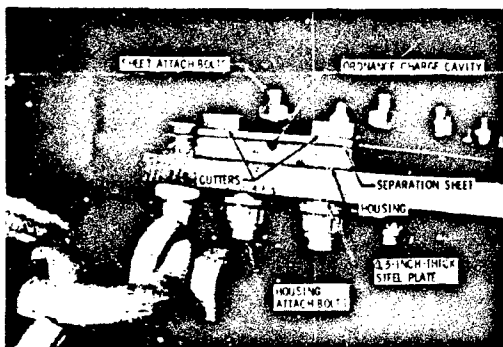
One-half-inch steel plate ordnance housing assembly
